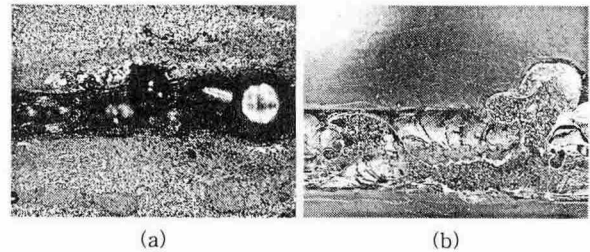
Weld defects for autogenous laser lap welding of zinc-coated steel sheets ; (a) Top view of weld, (b) Longitudinal cross-section
